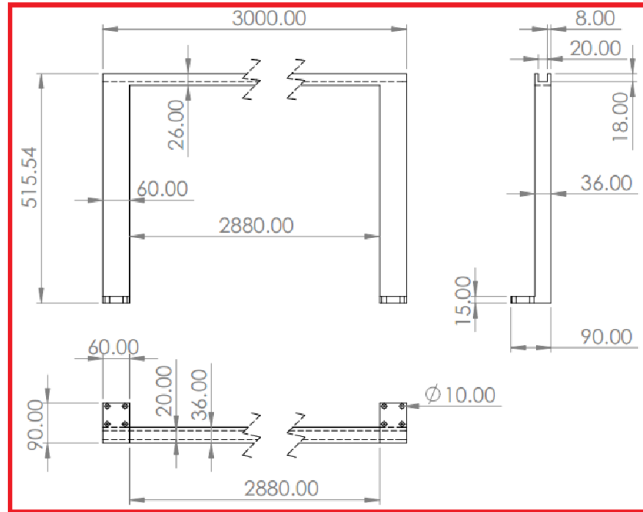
Far Side Connector Geometry and Dimensions (mm)
